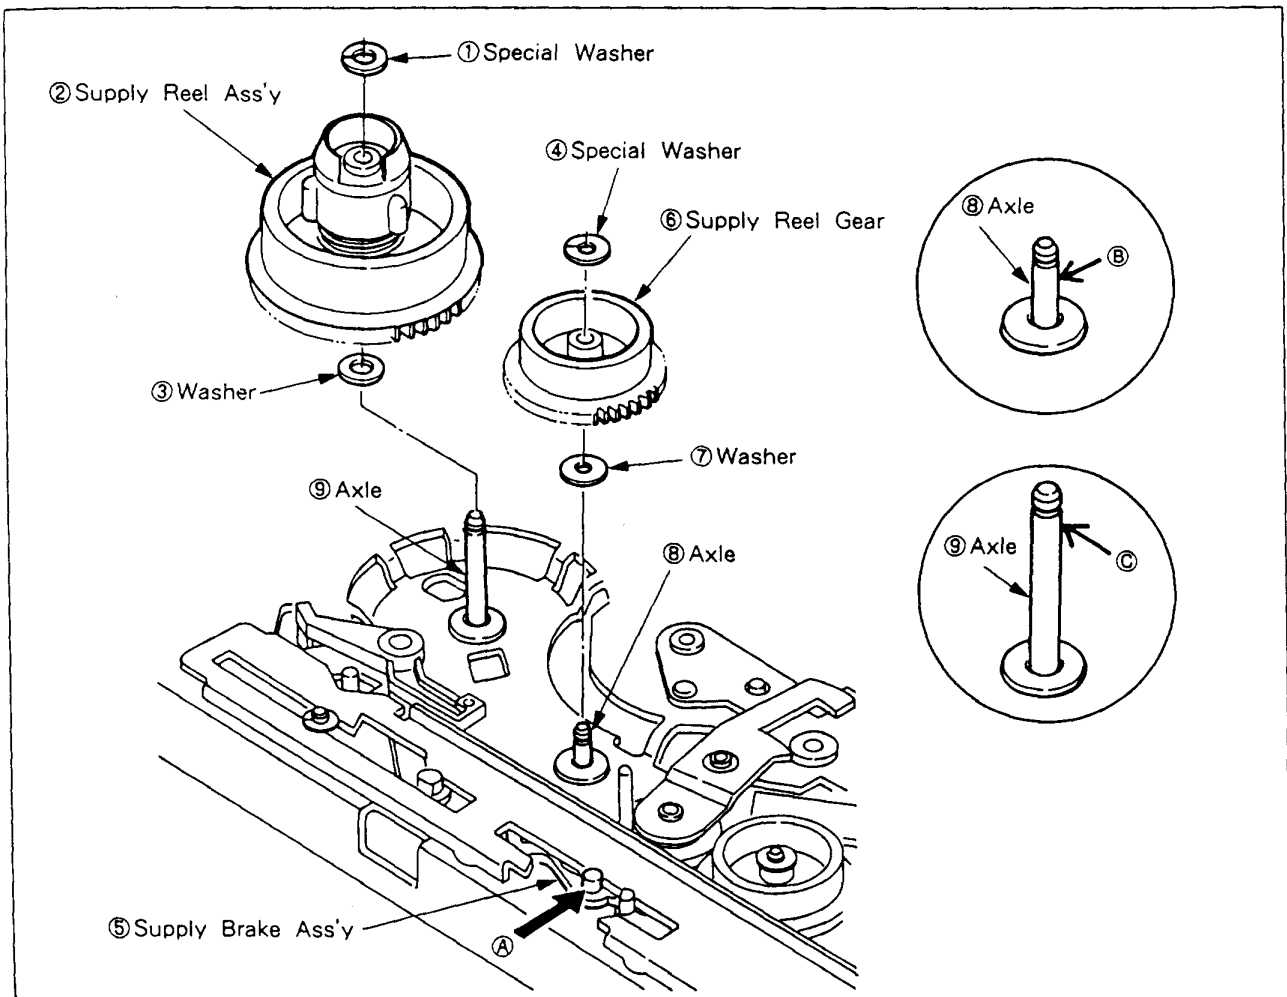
Supply Reel Ass'y & Supply Reel Gear
